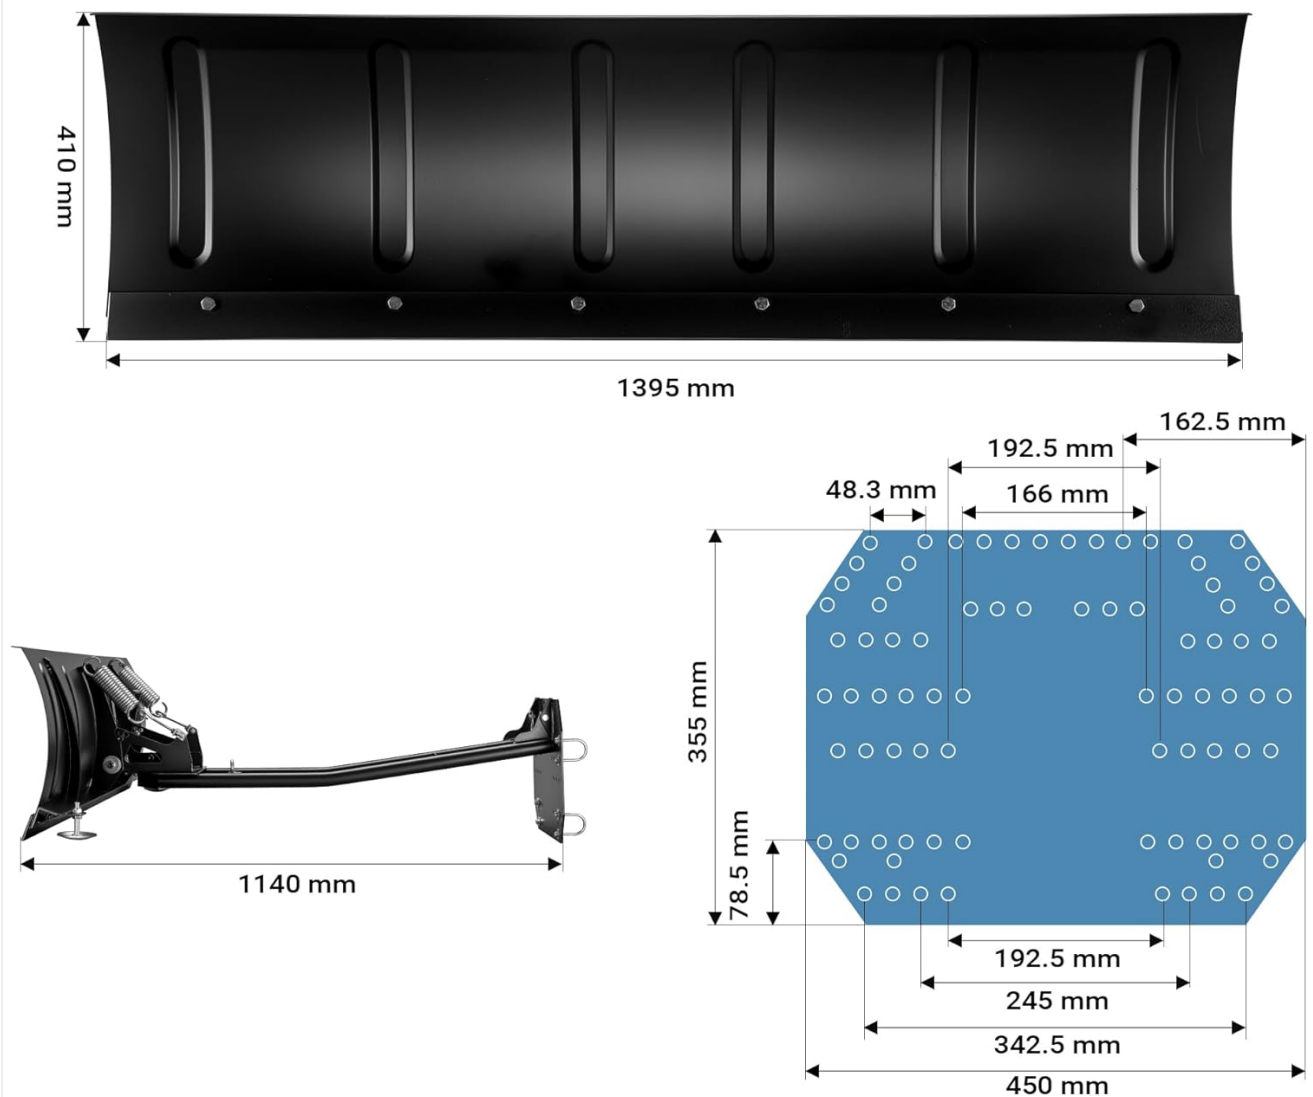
Detailed dimensions of the snow plow blade and its mounting plate, crucial for proper assembly and vehicle compatibility.
